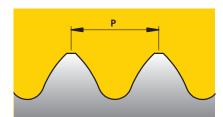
The Radius Profile™ thread increases surface contact between screw and nut member.
